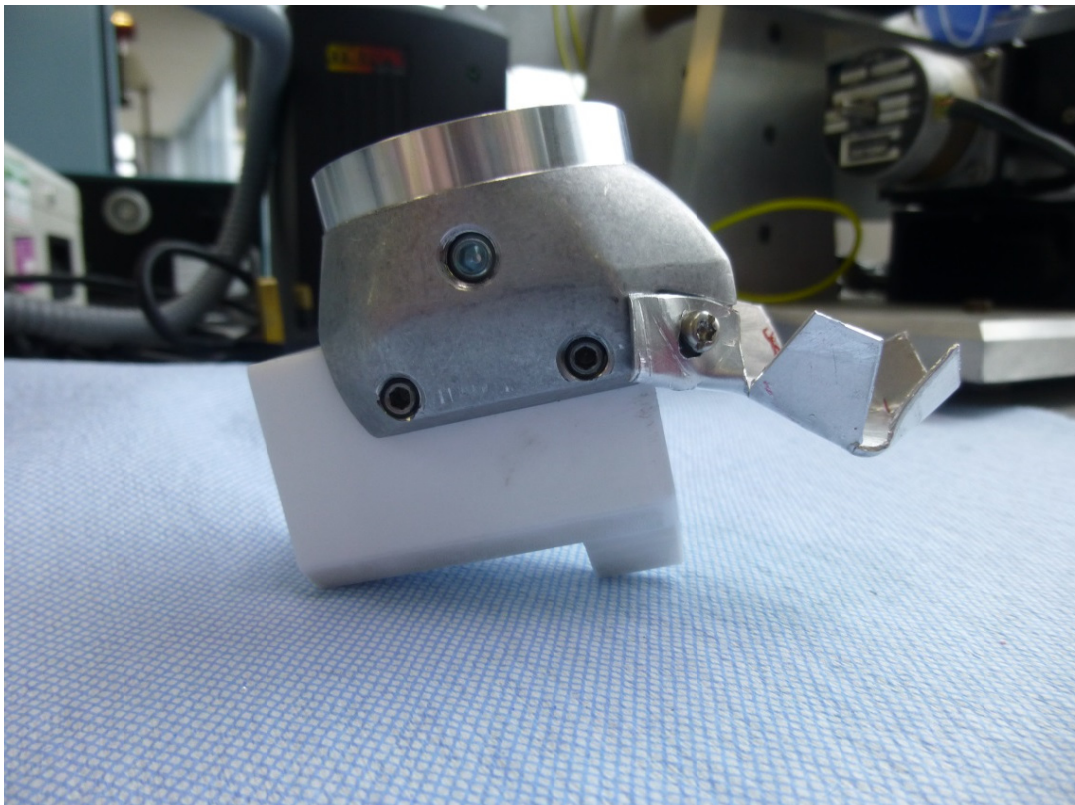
Extrusion welding gun nozzle with preheat deflector plate attached.
